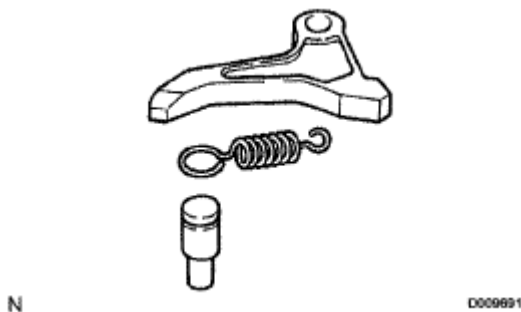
Installing Pawl Pin And Spring To Parking Lock Pawl
